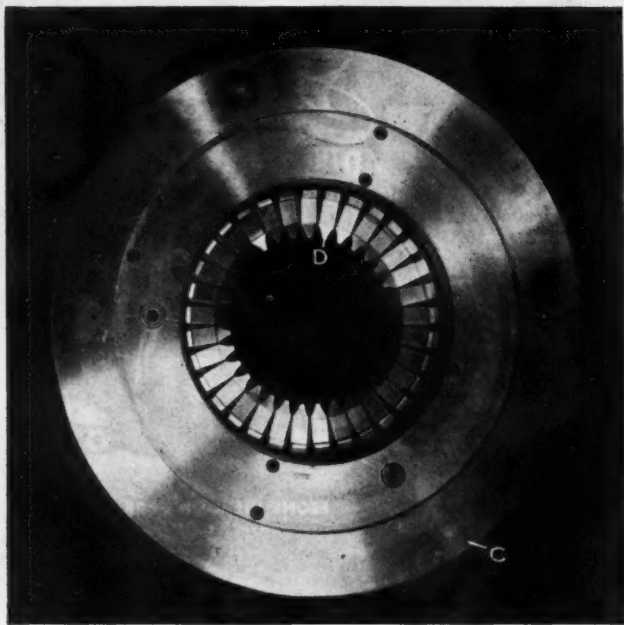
Gear Tooth Cutter-head Used on Machine
